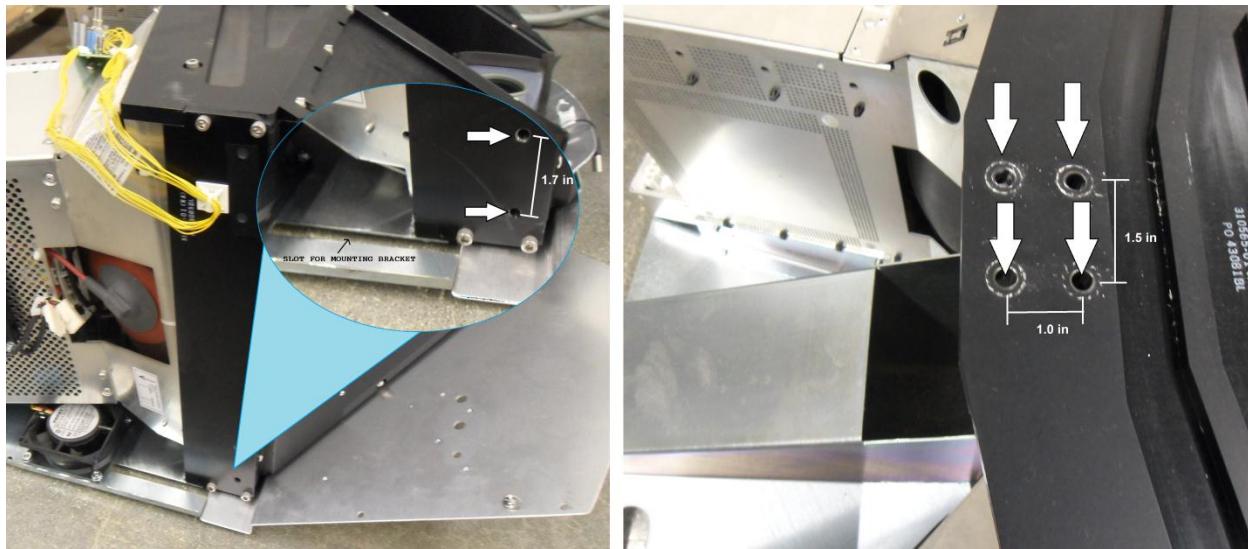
HRSV MOUNTING POINTS- LEFT: SIDE MOUNTING HOLES. RIGHT: TOP MOUNTING HOLES.
